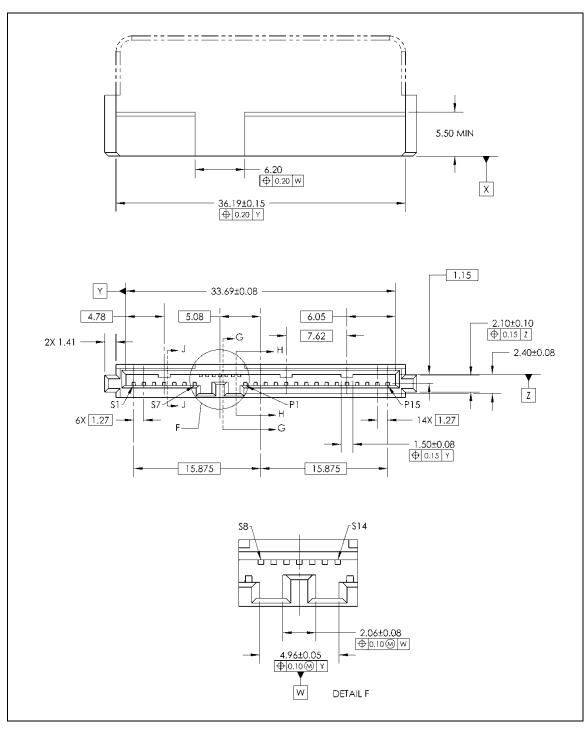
SATA Express device cable receptacle connector drawing (part 1 of 2)
